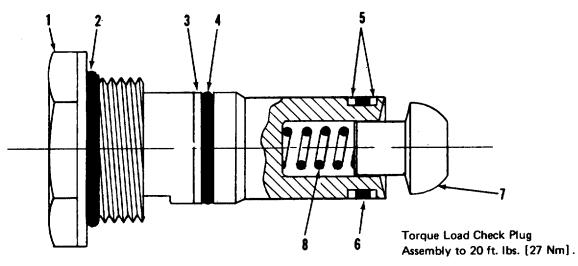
LOAD CHECK PLUG ASSEMBLY
